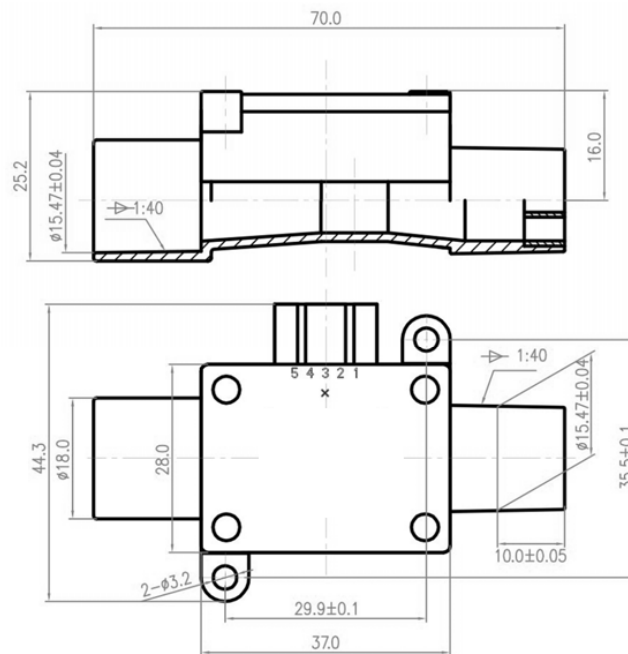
PFLOW9015CL mechanical dimensions with ISO15mm connectors.
